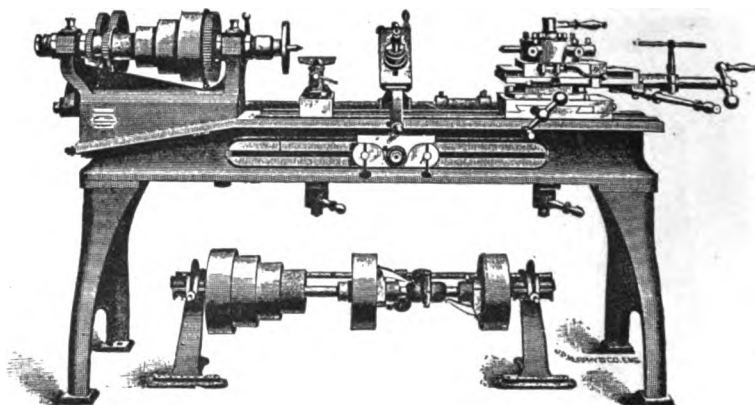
NO. 2 IMPROVED TURRET LATHE.
